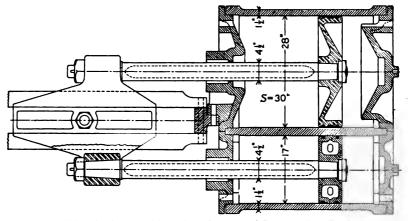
Cylinders of Vauclain Compound Locomotive, Baldwin Locomotive Works. Scale 1 to 24.
